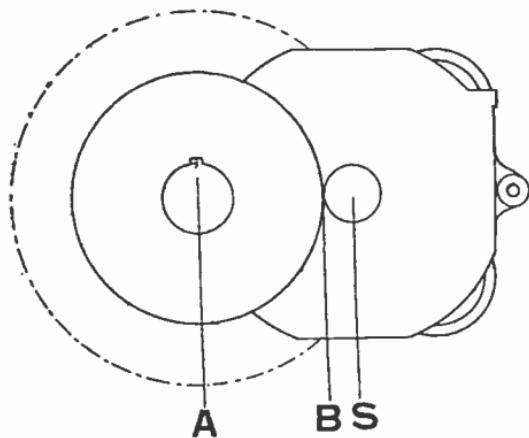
,169.—Diagram for laying out locomotive motor gears.
